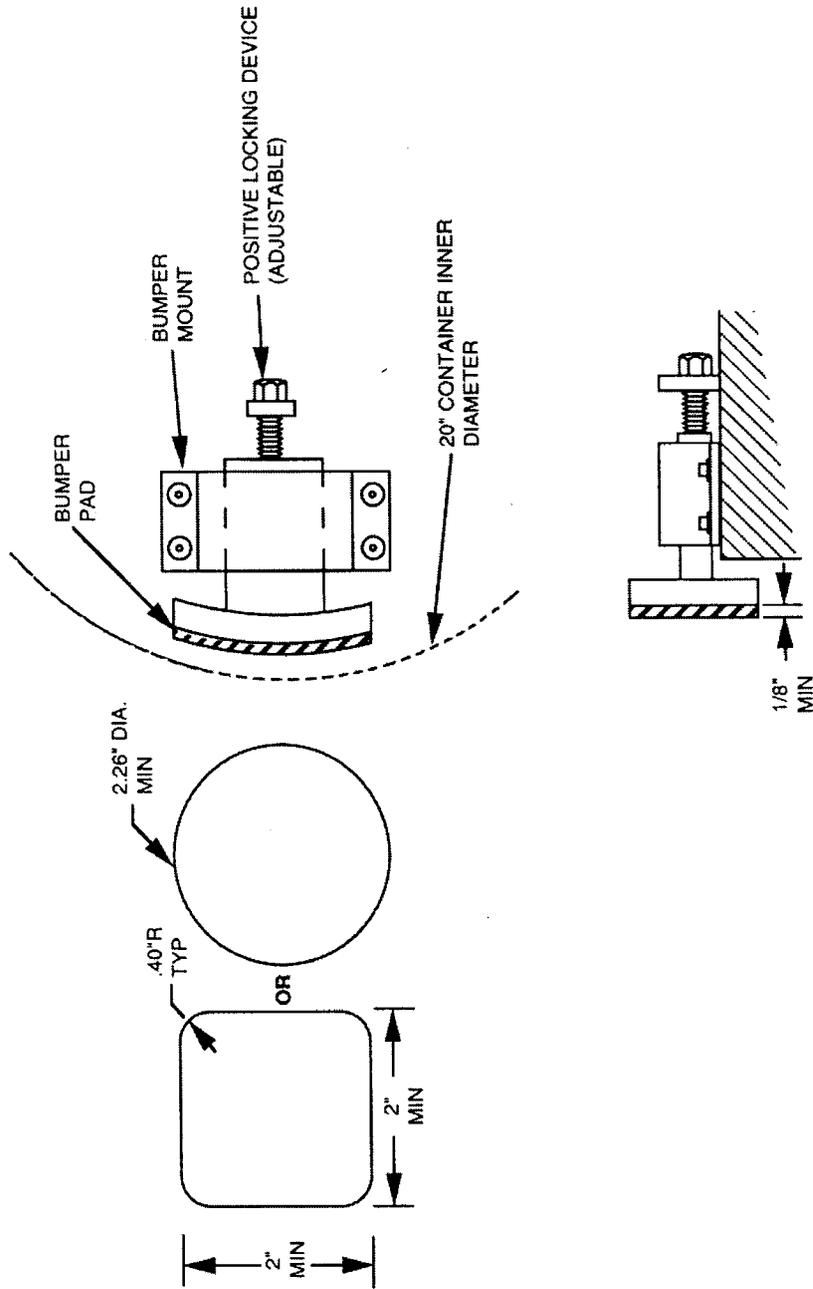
BUMPER DESIGN EXAMPLE
